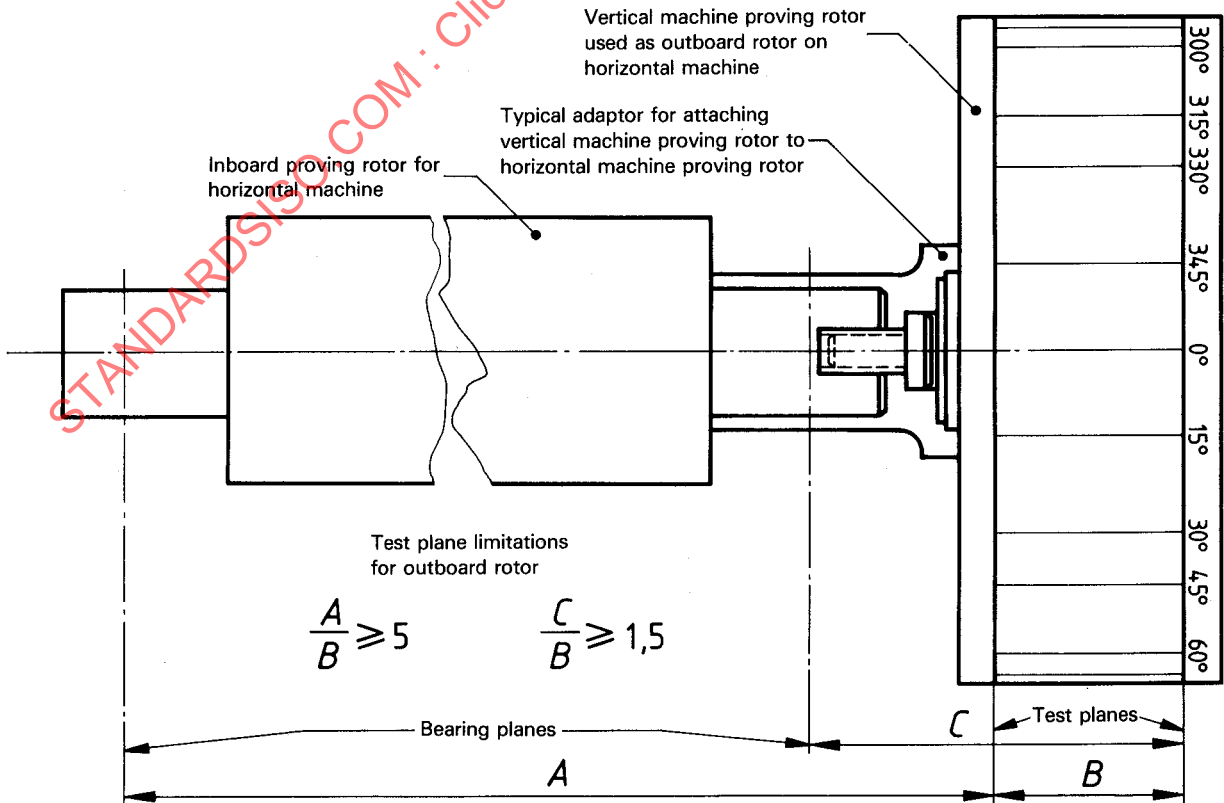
Typical attachment of vertical machine rotor to horizontal machine rotor for outboard tests
